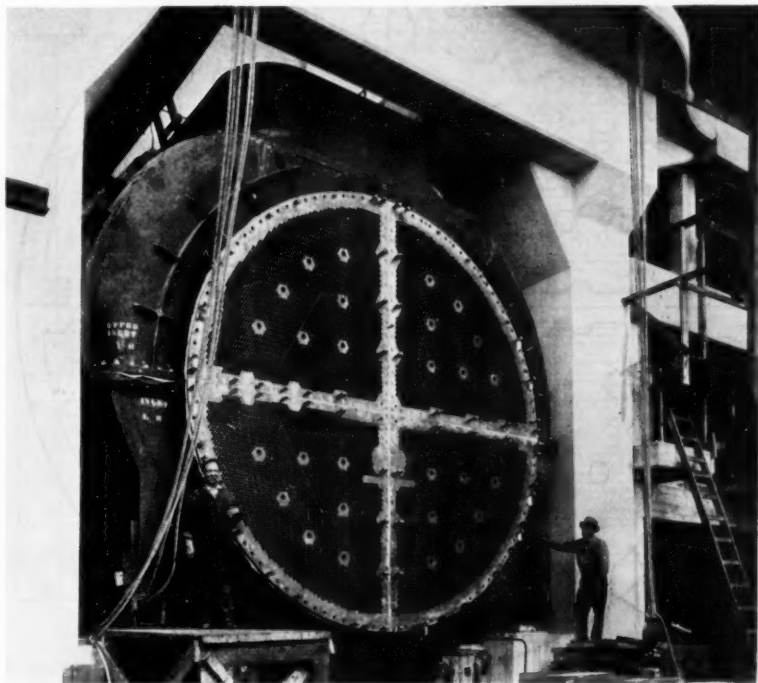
TUBE SHEET NO. 9 CONDENSER
